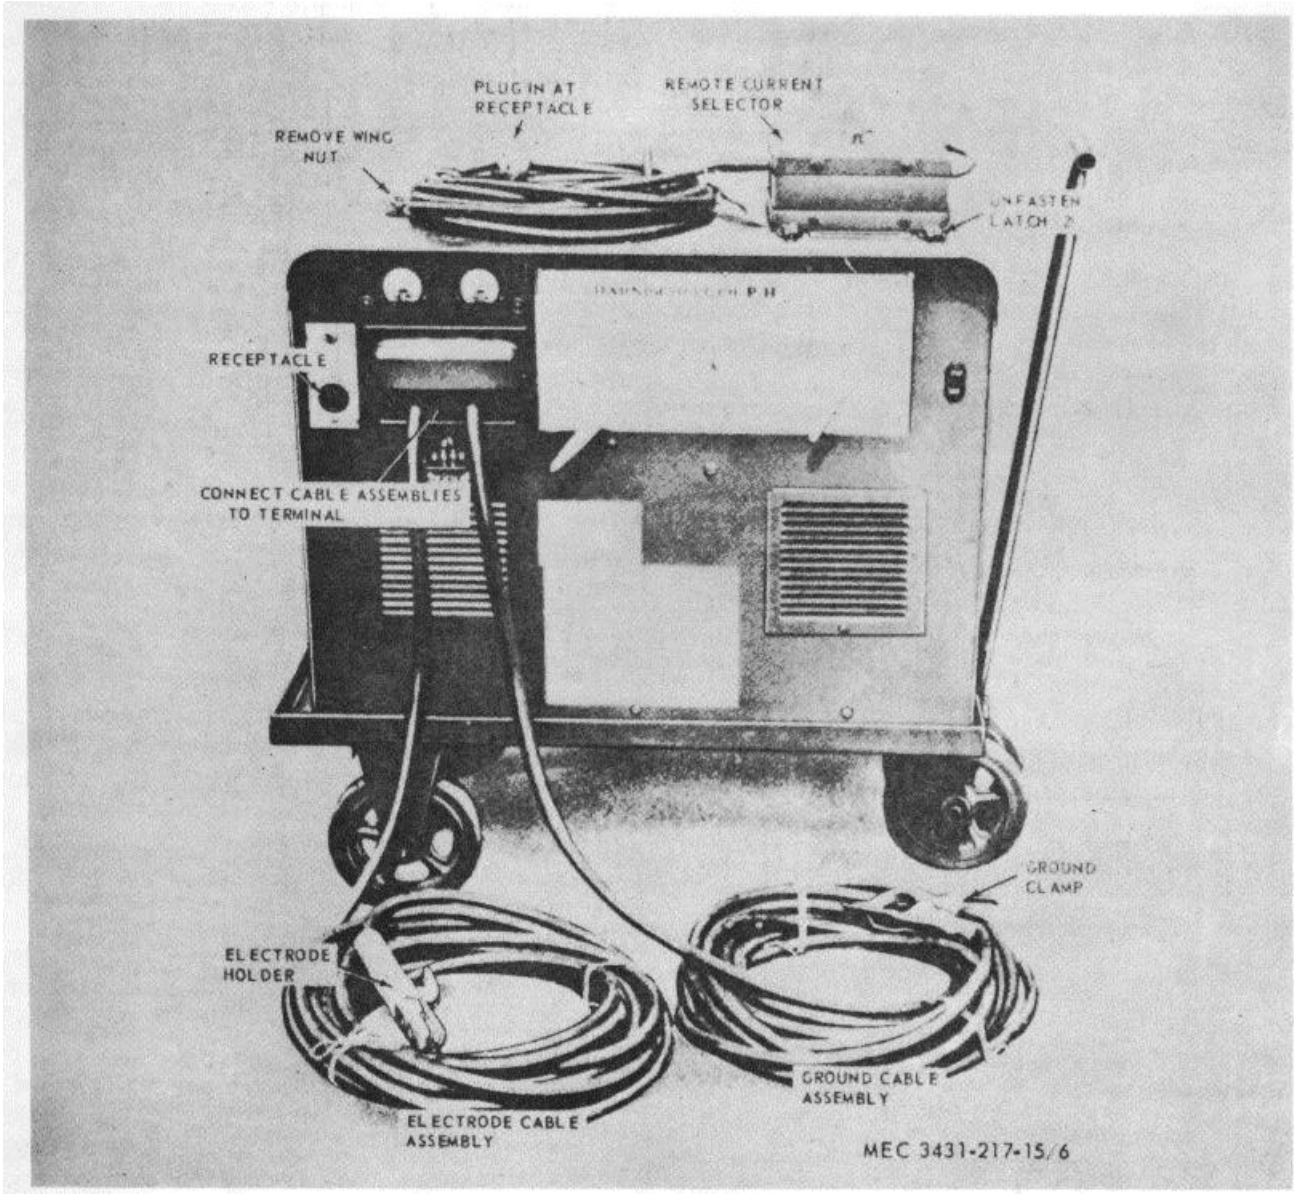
Welding cables and remote rheostat current selector assembly connection., removal and installation.
